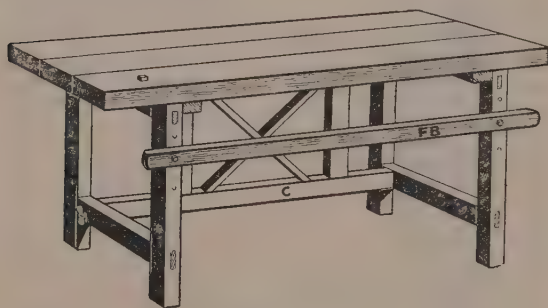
FOLDING BENCH, 5 FT. 6 IN. (OPEN).
